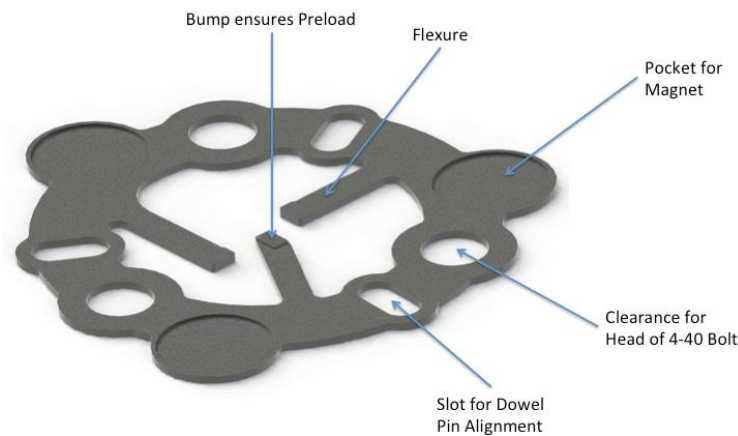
Bottom of Out of plane Ball Mount Holder.
